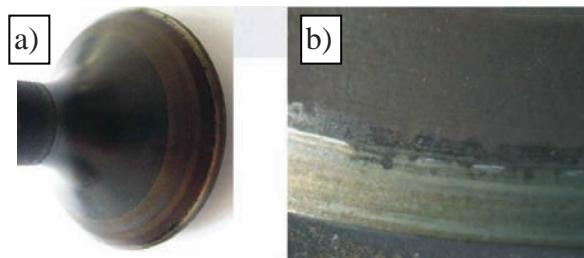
An ASz-62 engine valve after a bench test: a) - a valve head; b) - a valve face
